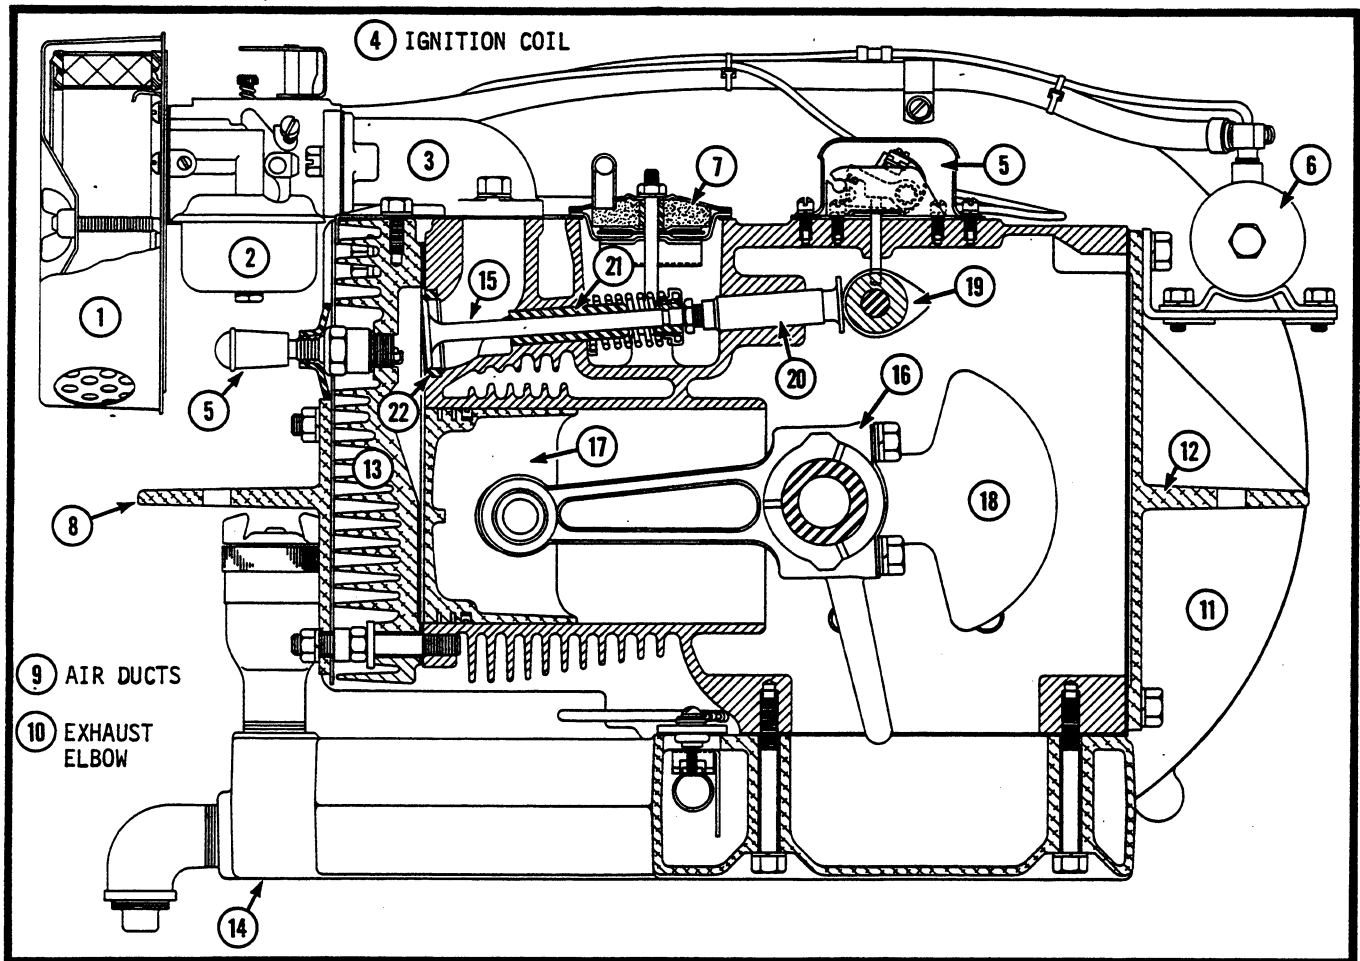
CUTAWAY VIEW OF ENGINE--SUGGESTED SEQUENCE OF DISASSEMBLY
